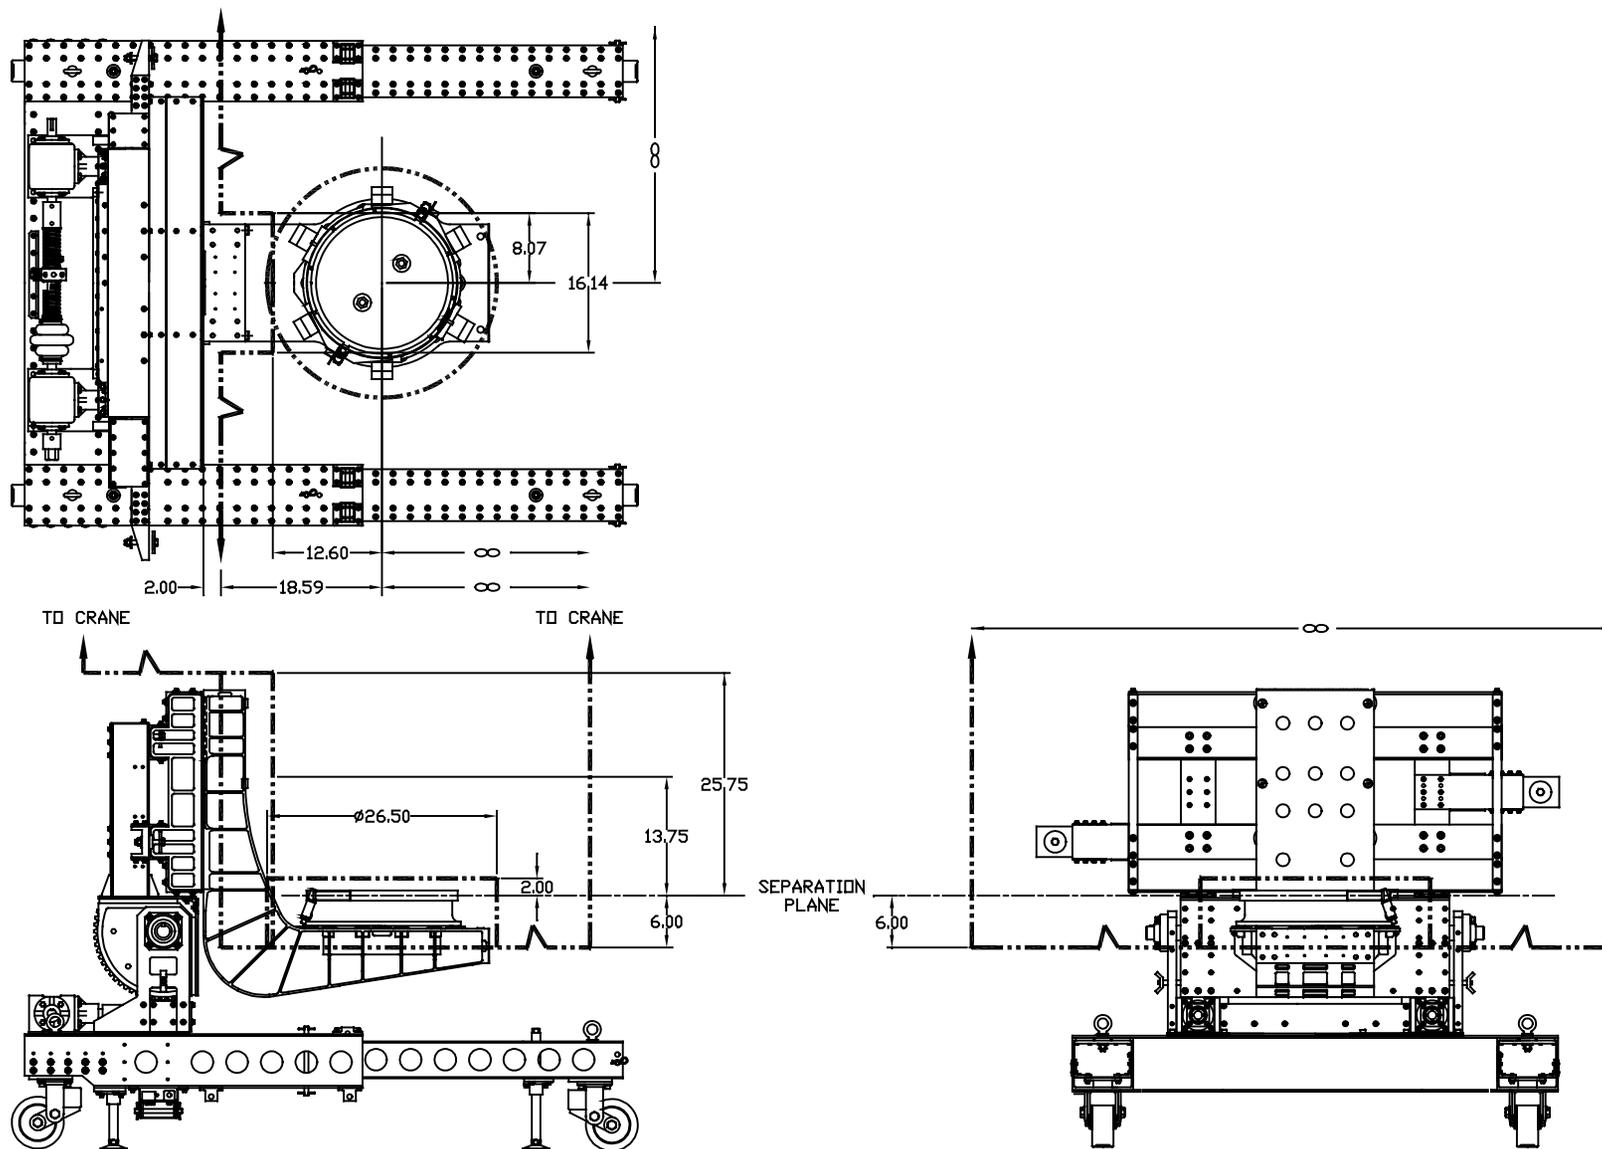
Lifting Fixture Envelope for a Sidewall Adapter Beam Configuration
